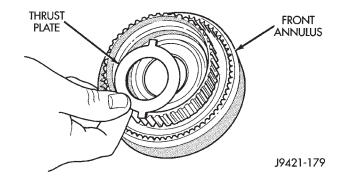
Positioning Thrust Plate On Front Annulus Support
